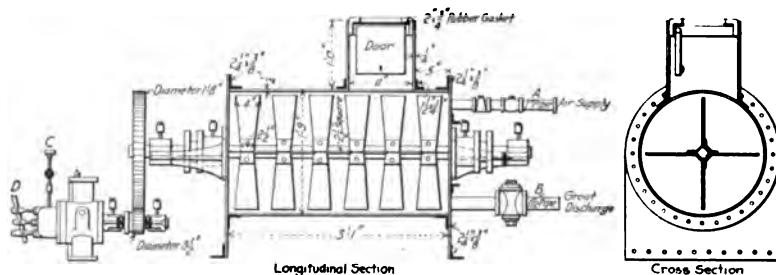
Greathead type of grouting machine driven by compressed air engine.
